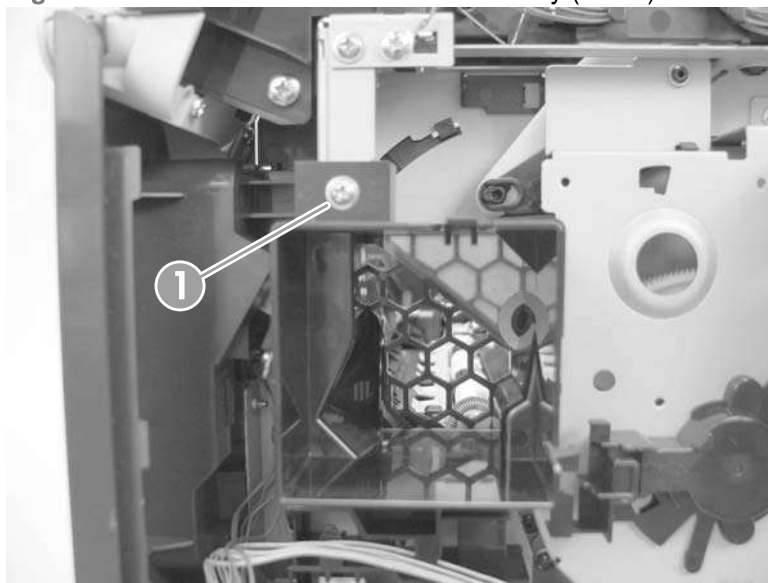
Remove the fuser-motor assembly (3 of 3)
